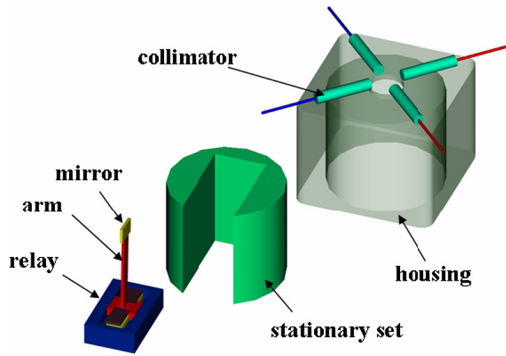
The schematic and exploded view of the 2 × 2 optical switch.
